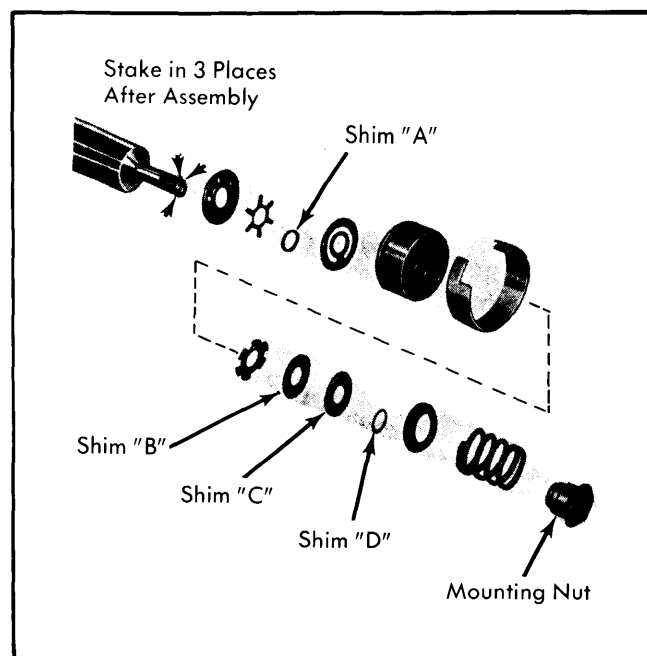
Reassembly Sequence for Buffer Valve. Assemble Components Over Strut Shaft Stem. Refer to Table for Correct Shim Thickness.
